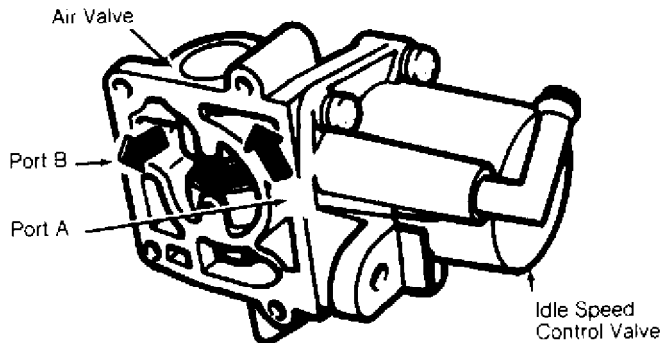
Testing Air Valve (B2200, B2600i, MPV 2.6L, MX-6 & 626)
